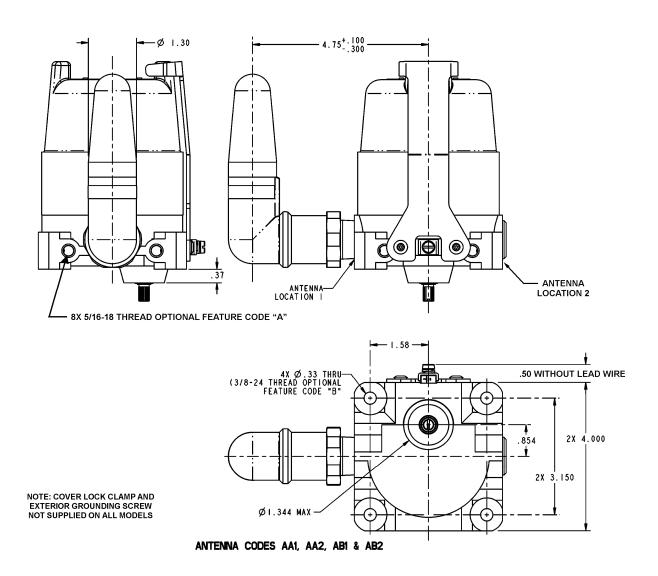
WCX Valve Position Sensor rt. angle antenna dimensions
